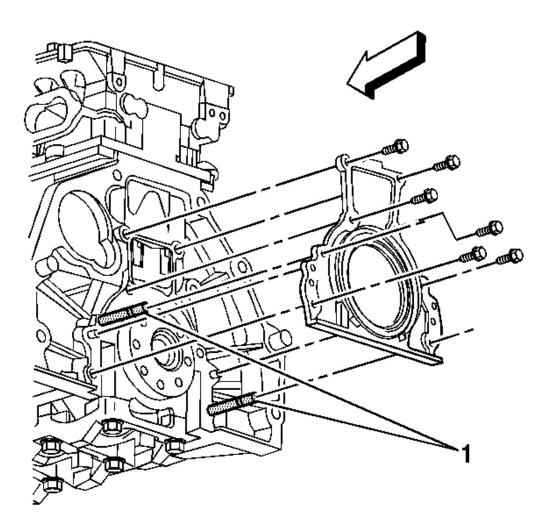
View Of J 44219 Guide Pins Installed Into Rear Of Engine Block Courtesy of GENERAL MOTORS CORP.
